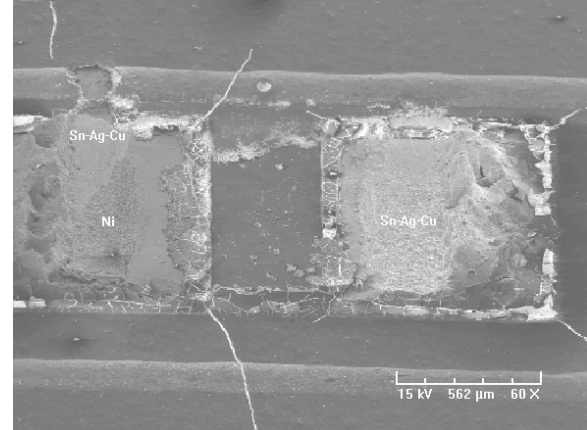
Fracture Surface of SAC305 Solder Joint After Thermal Shock
